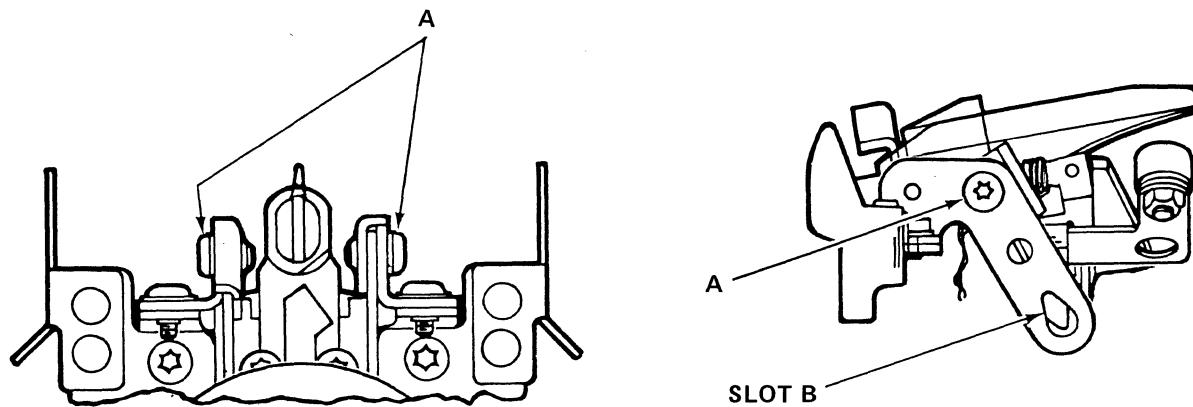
PRINT HAMMER TOP-TO-BOTTOM ADJUSTMENT
